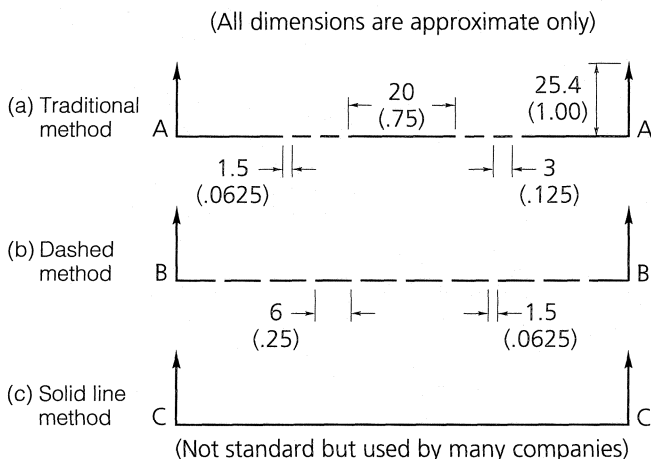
Dimensions for Drawing Cutting-Plane Lines and Arrows
